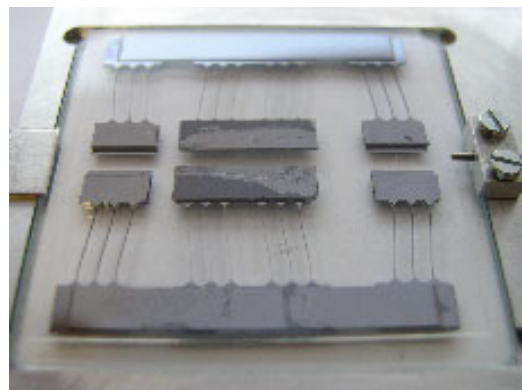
Demonstrator of a solid hinge guide completely mounted and deflected
